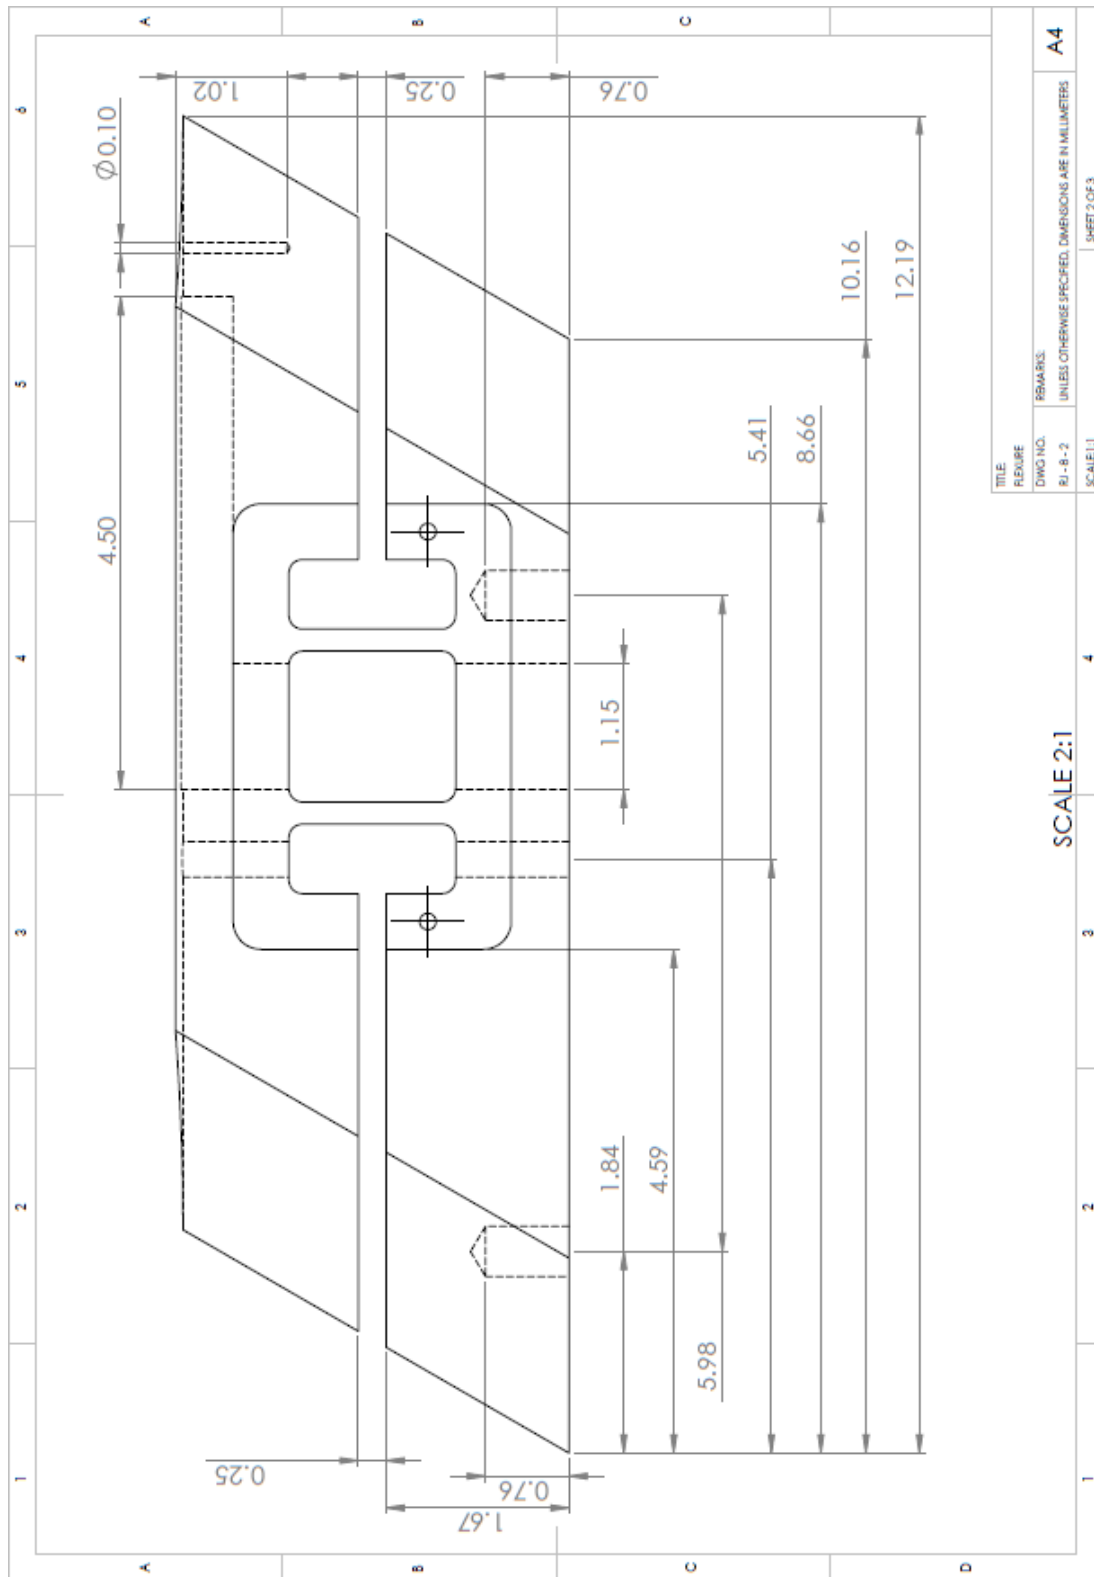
Part drawing: Flexure (RJ – 8 – 2)
